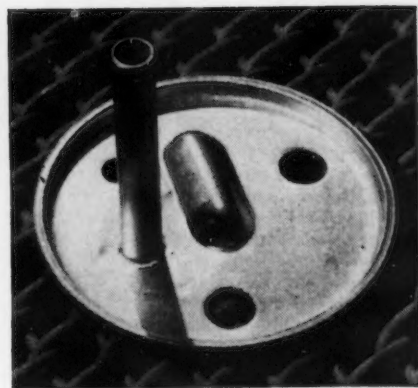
Assemblies while being furnace brazed can rest directly on the alloy mesh-belt conveyor or charging trays used in the furnace.
